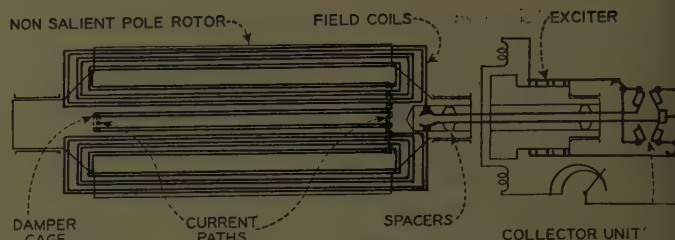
Main circuits of lightweight rotors. Conductor ends are welded together to form field coils
